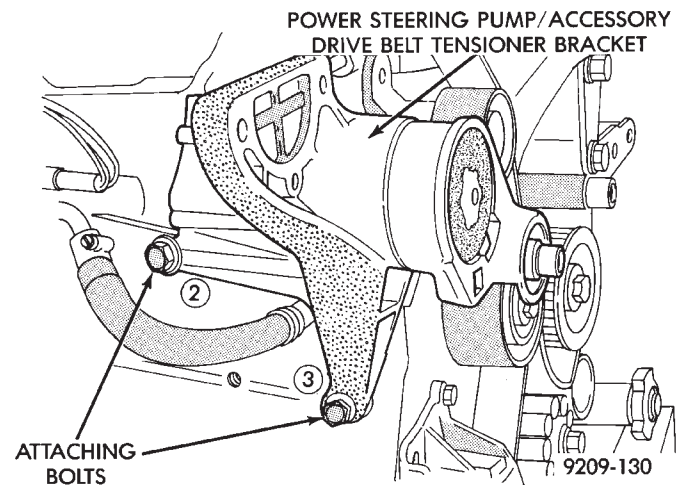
Power Steering Pump Bracket and Timing Belt Idler Bolt
